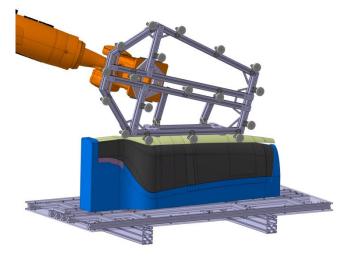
Preliminary test of the deposition of cut-pieces with the clamping method
